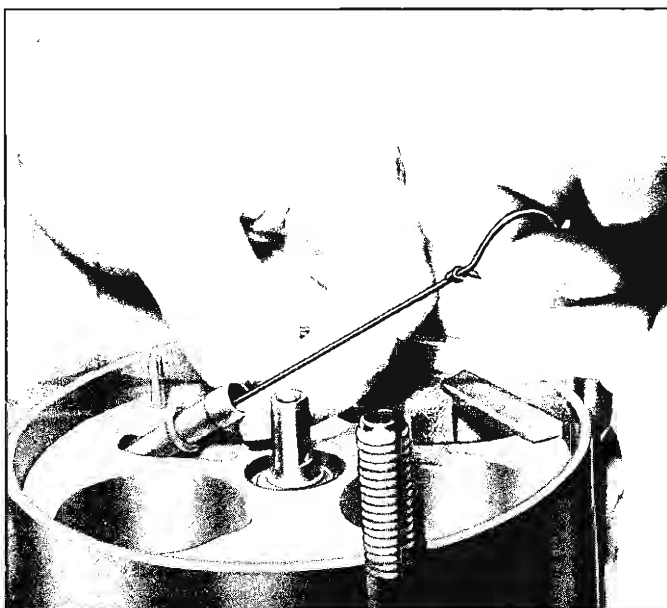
Removing Oil Inlet Tube and "O" Ring
